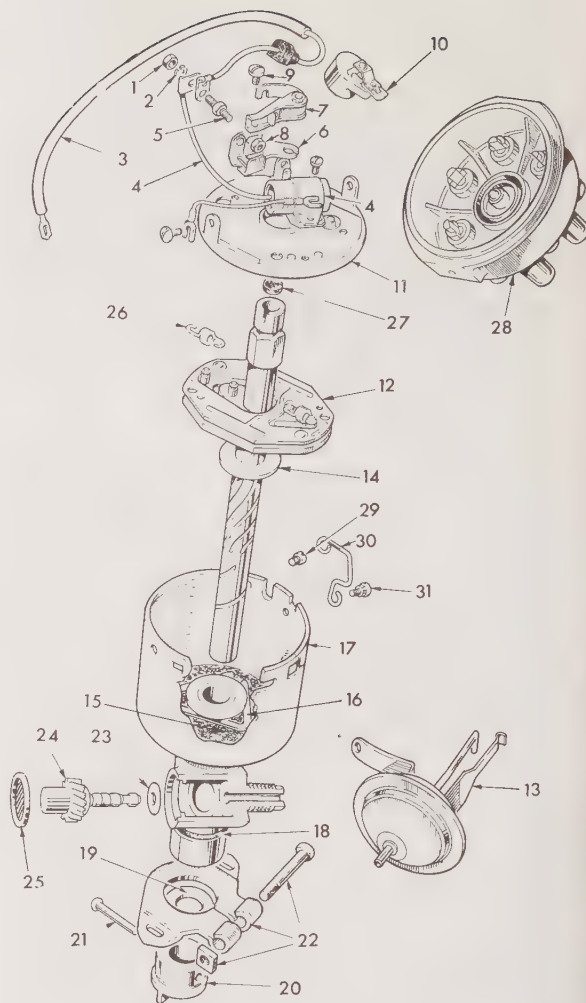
4 Components of AC Delco distributor incorporating tachometer drive.
